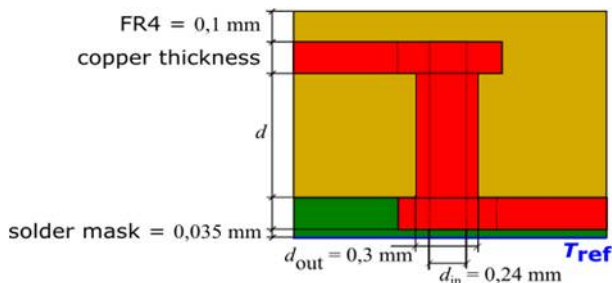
Investigated PCB layout setup for high-current systems—two layers connected by thermal via—copper cross section constant @ different layer distances.
